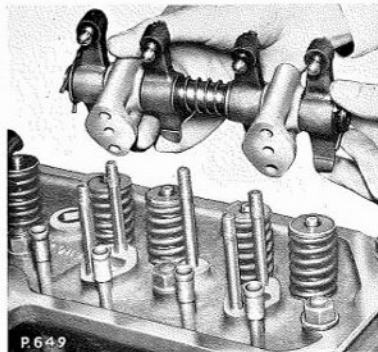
Refitting the rear half of the split rocker shaft assembly
